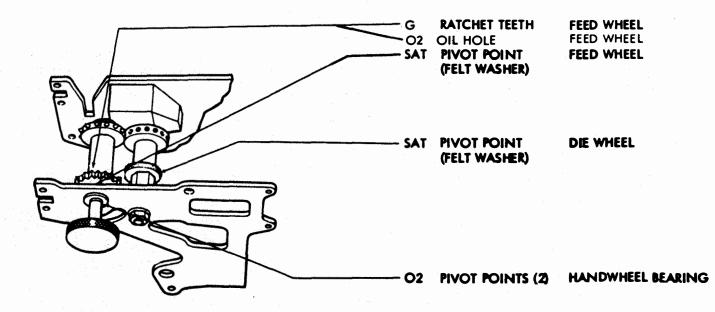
Punch Mechanism for Chadless Tape (Sheet 2 of 2)
